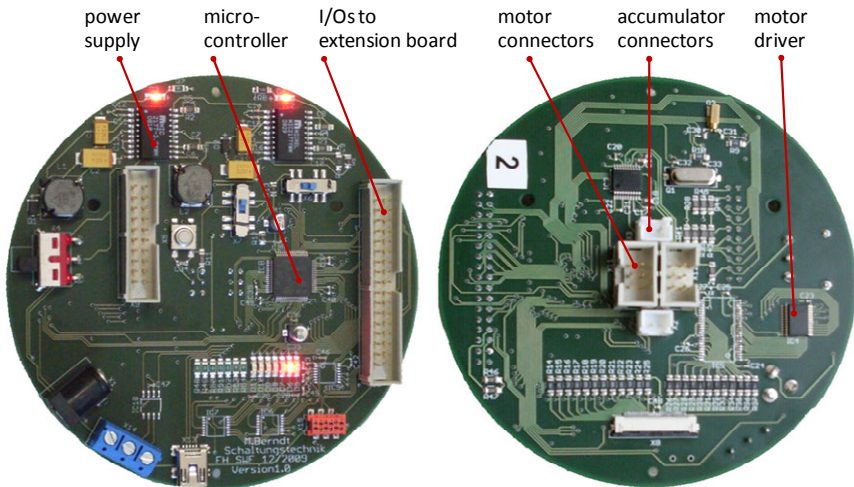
Base board with microcontroller and interfaces; top view and bottom view
